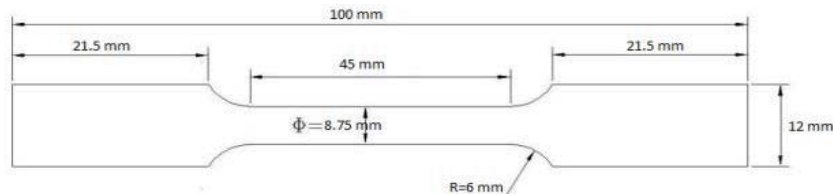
Dimensions of tensile test specimens for 7% SiC – aluminum metal matrix composite.
